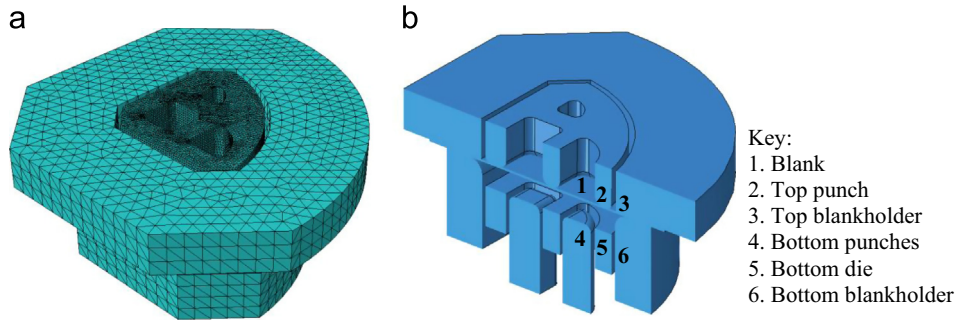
(a) Meshed view and (b) sectioned view of the tool part assembly used.
